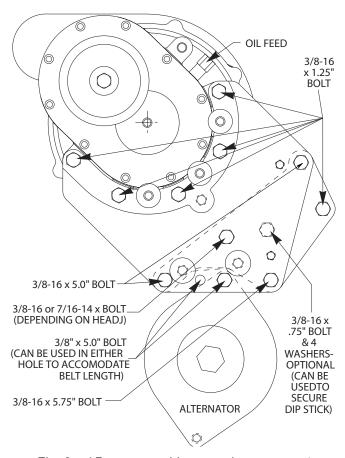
a / Passenger side supercharger mount. ('64-'68 Mustang)
